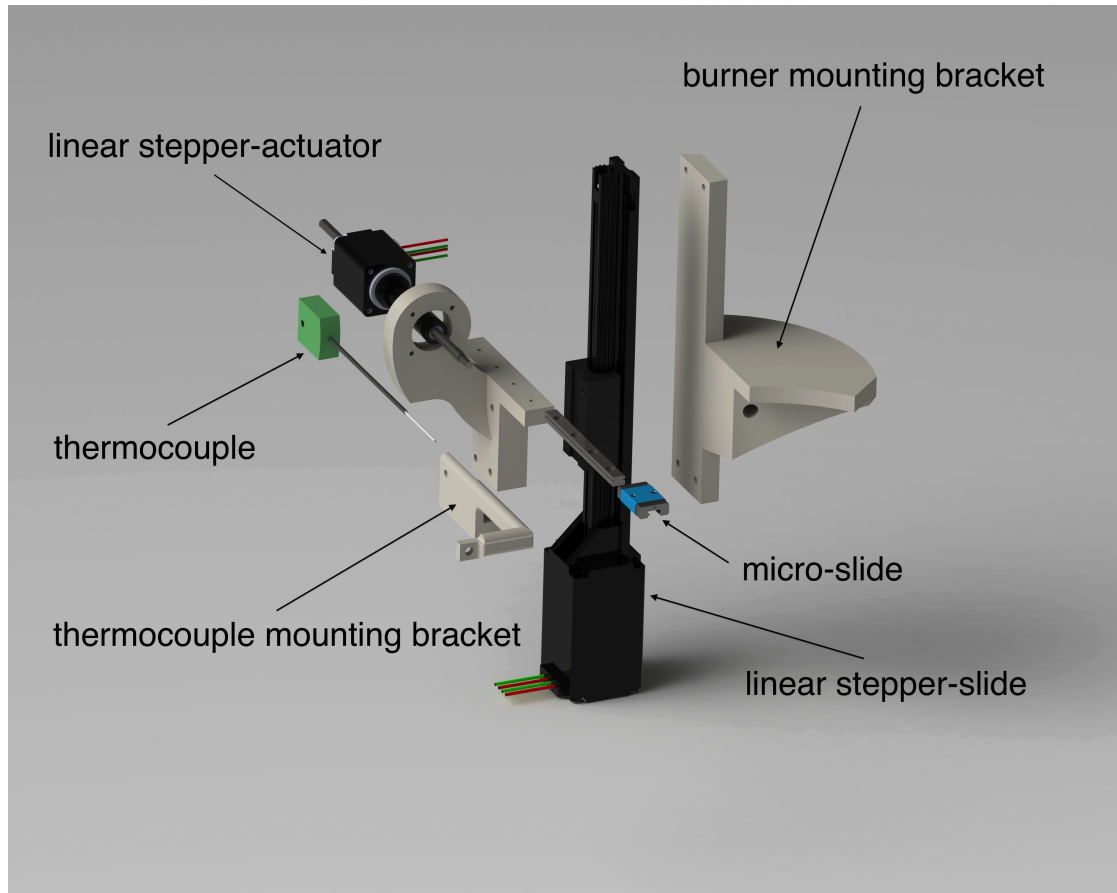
Exploded-view CAD rendering of the XY-stage assembly used in the HPCEF for flame temperature measurements.
